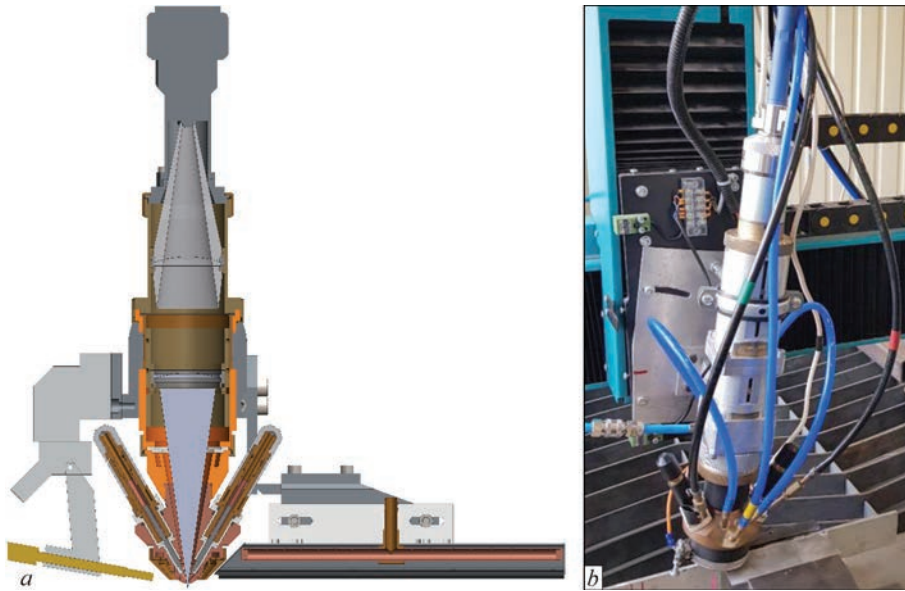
3D-model (a) and appearance (b) of the head for laser and laser-plasma welding, developed at PWI [46]
